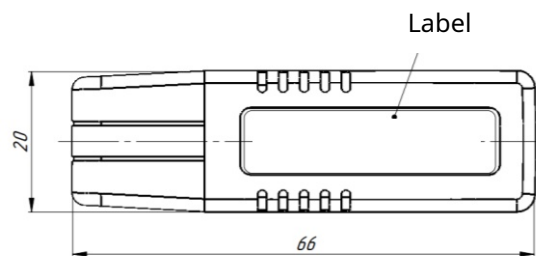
Dimensional drawing of the BRU2 model Reader (thickness 12.5mm)
